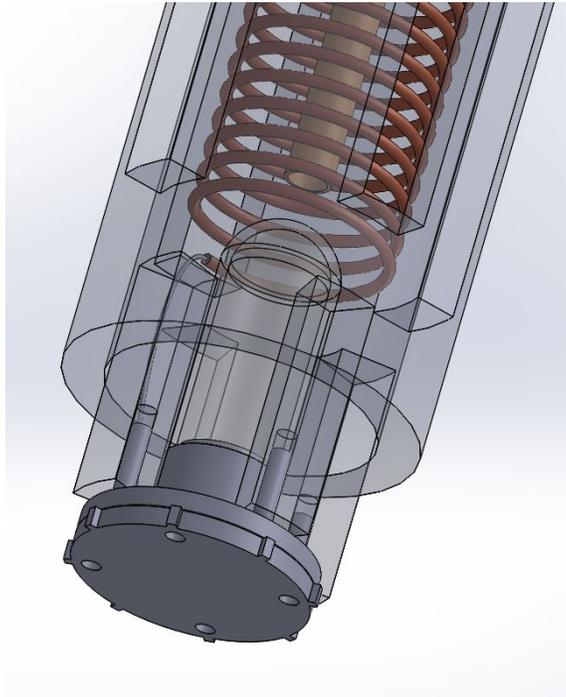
The dilution insert showing the inner layer with the glass mixing chamber and lower tube-in-tube heat exchanger.
